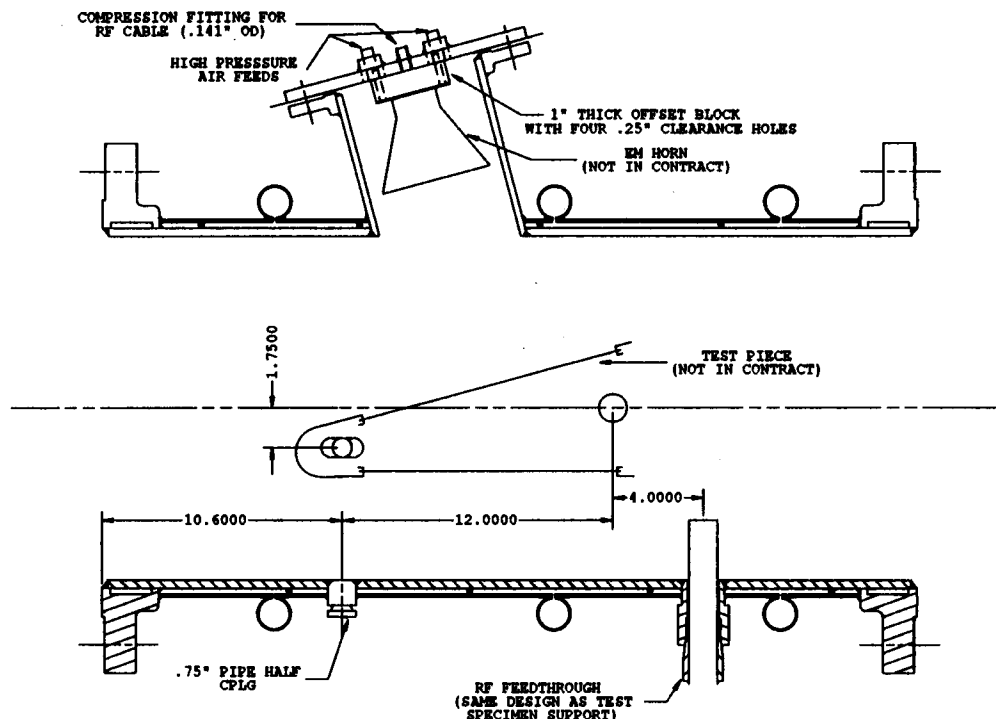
Illustration of test fixture for reflection and transmission measurements.
